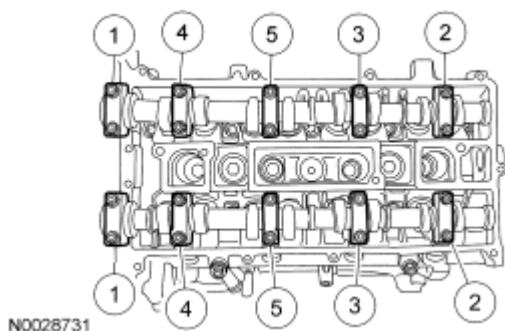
Identifying Loosening/Tightening Sequence Of Camshaft Bearing Bolts
